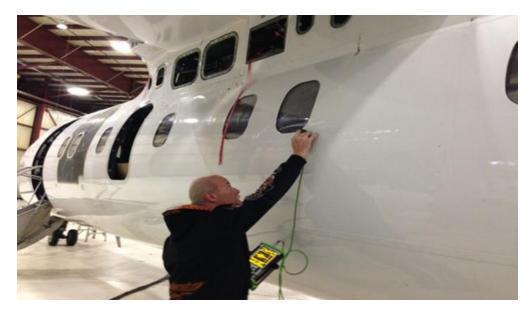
Fuselage inspection using ultrasonic diagnostic
